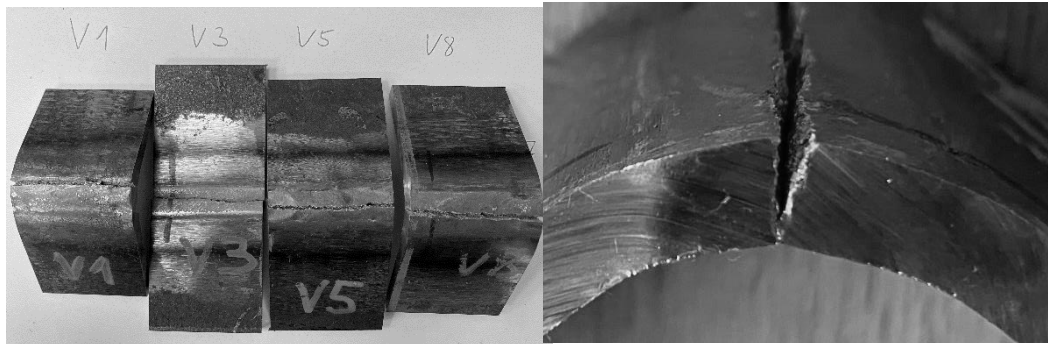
Fracture pattern of the top-side specimens with martensitic brittle fracture pattern
